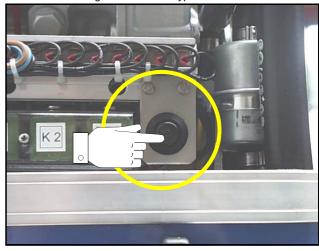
Ventilation screw at the fuel solenoid valve
